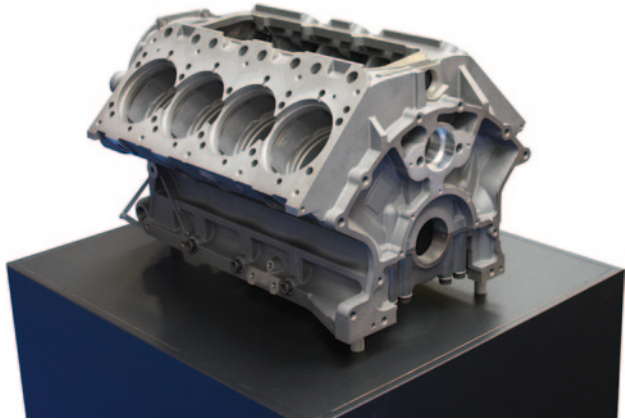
Cylinder block rear bulkhead and bell housing mounting face
